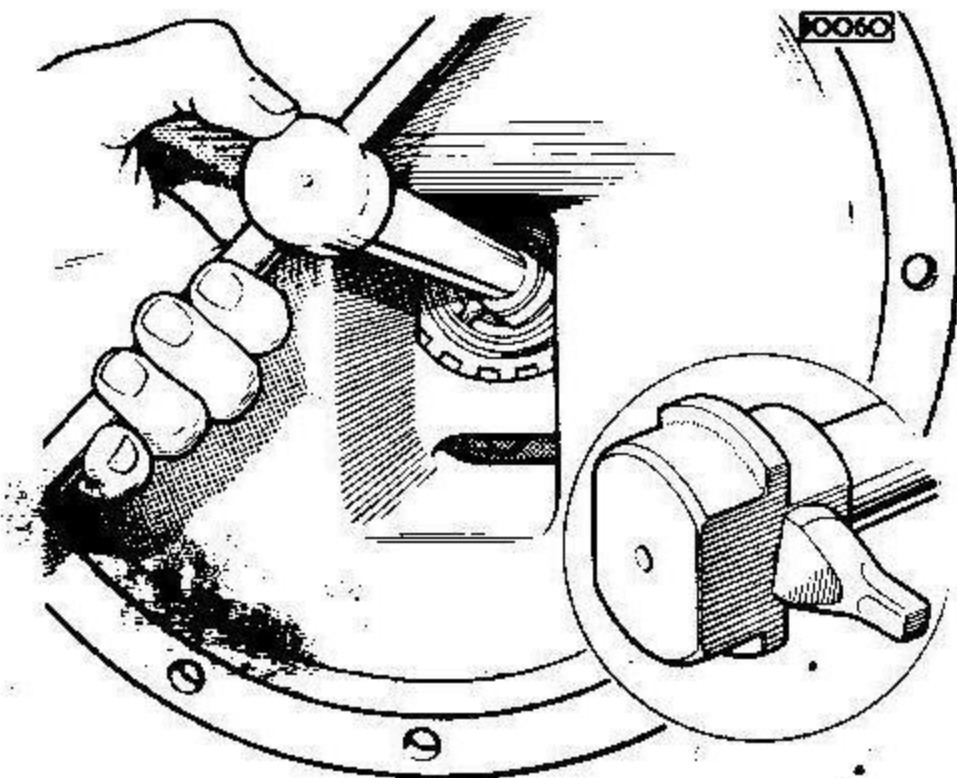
Adjusting the inner bearing ring. The inset shows the form of the special tool
